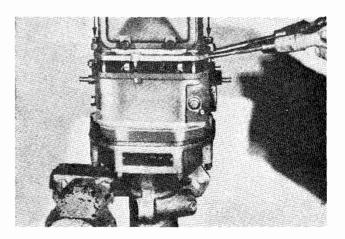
Method of fitting Gearbox to Overdrive Unit.
